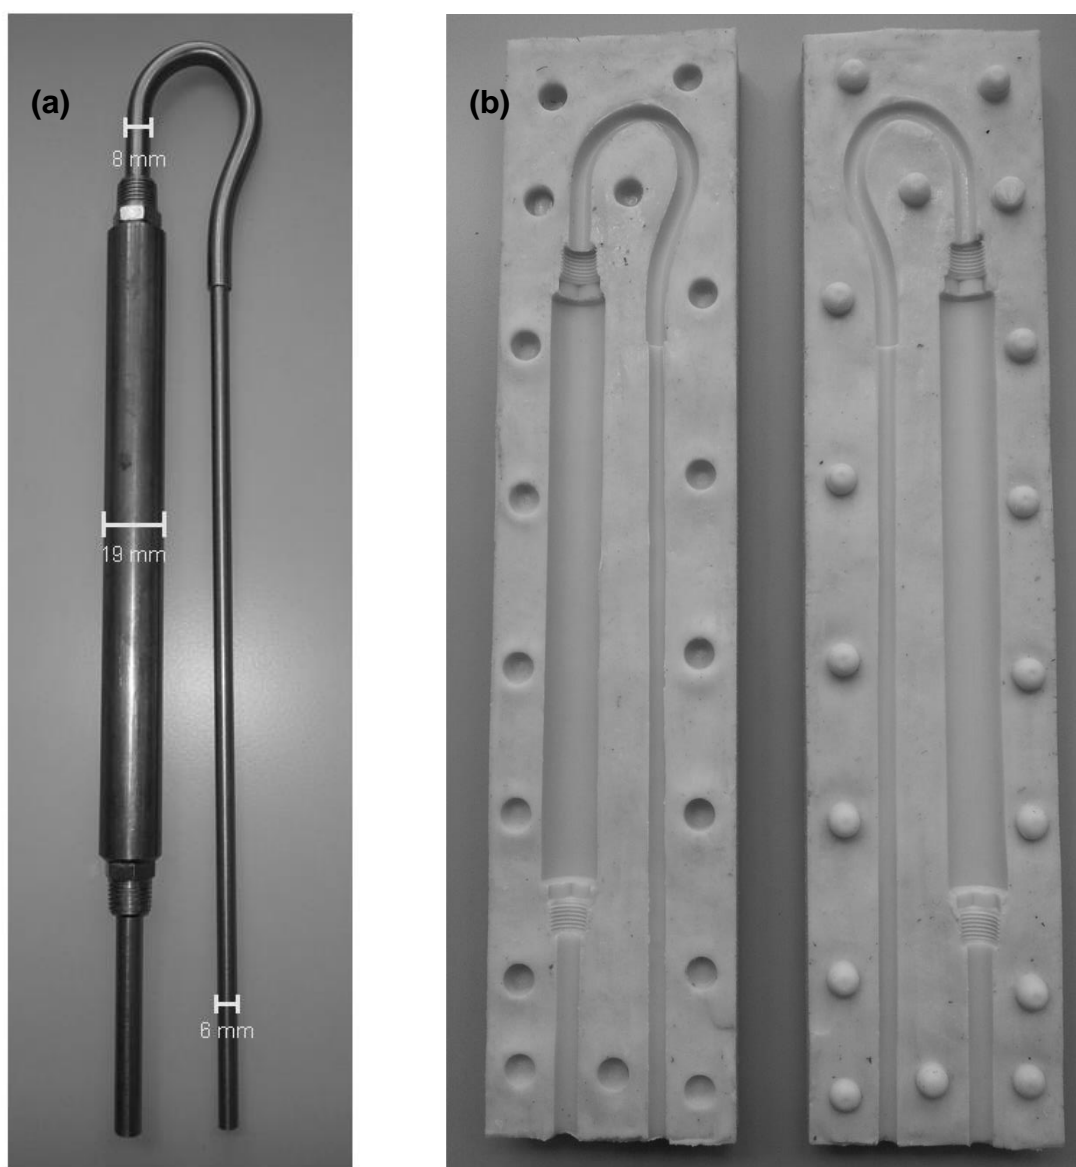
Helical module development of (a) model helical module and (b) silicone mould.
